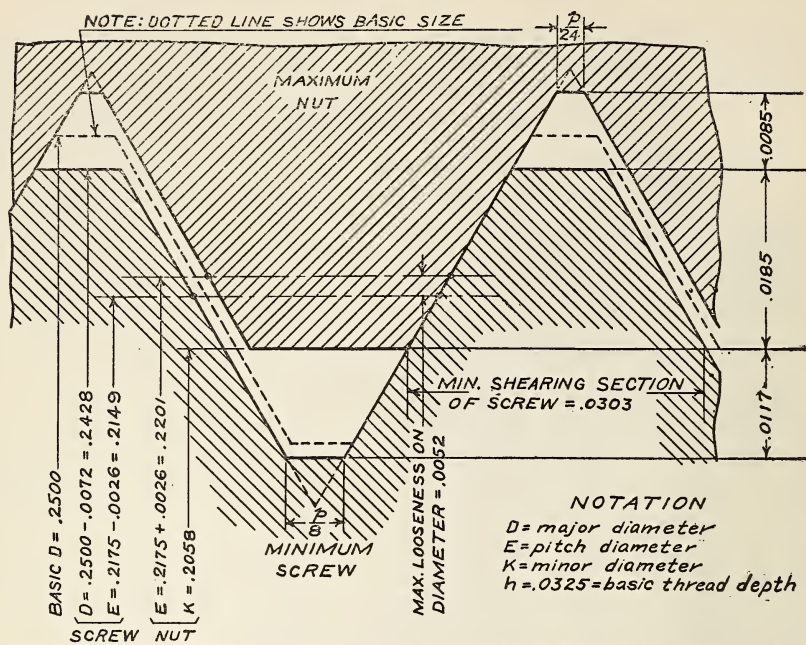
Illustration of loosest condition for class 3, medium fit, one-fourth inch, 20 threads.
